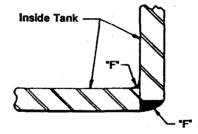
Corner of rectangular tank. Weld "F" should be burned into plate so welds meet from opposite sides, thereby excluding air pockets. Welds must be peened and ground flush.
